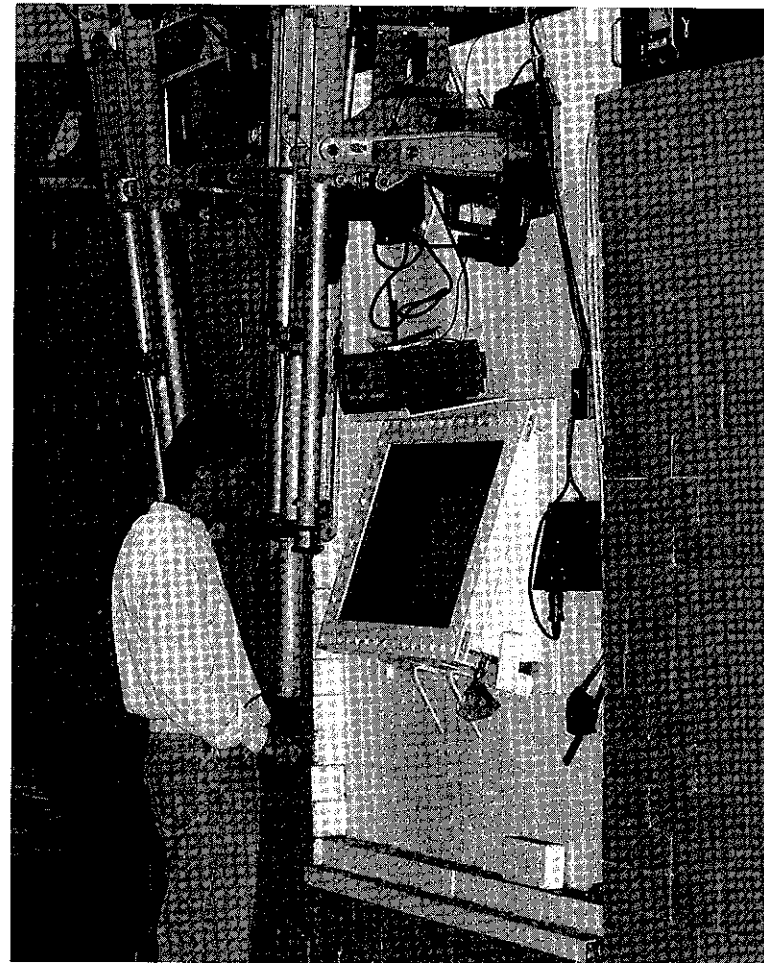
Several feet of heavy concrete shielding and glass containing lead are used to shield enclosures where radiography sources are manufactured. The operator uses master-slave manipulators to weld together the steel capsule containing the radioactive material.
